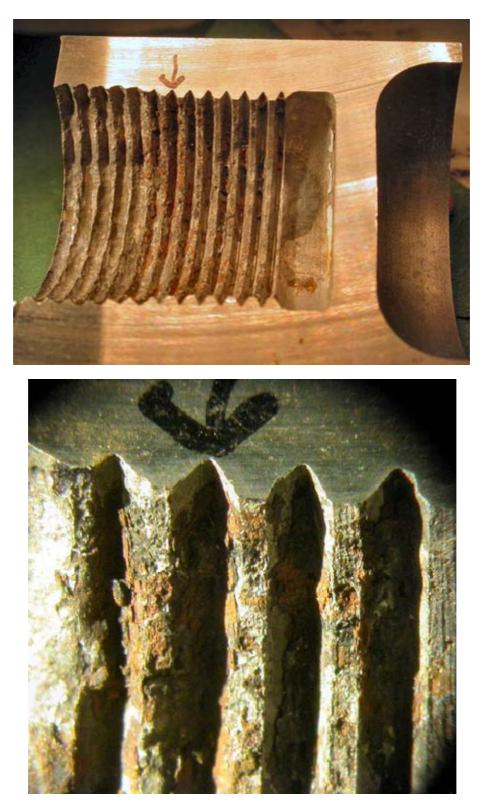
View of threads near bottom of piston rod. The arrow points to the last engaged thread.
